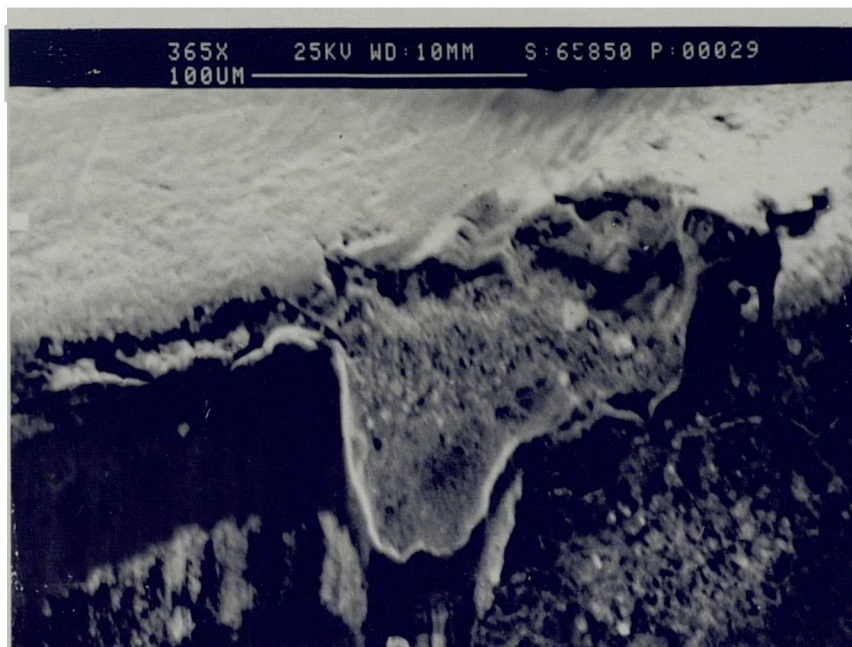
Plucking about to take place on the rake face of carbide coated tool.
